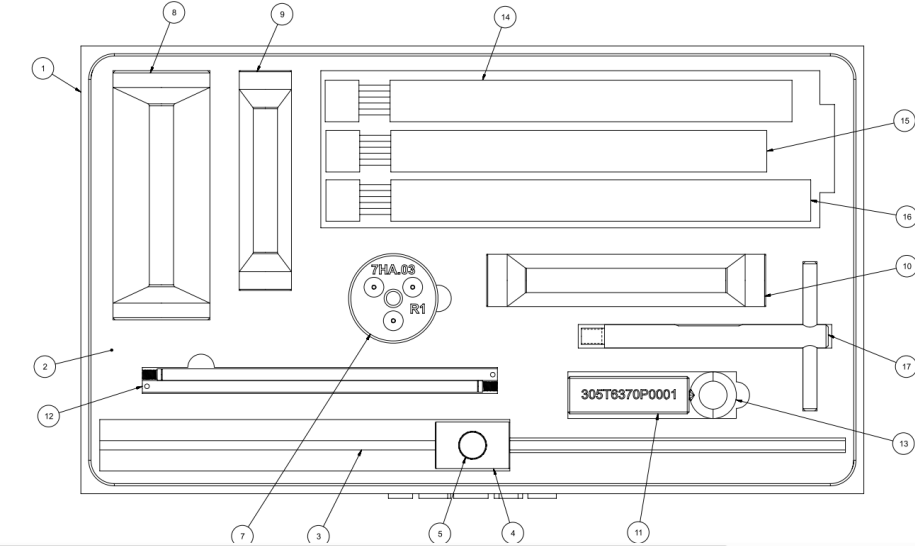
305T6367 7HA.01 01 Rotor Clearance measurement kit
